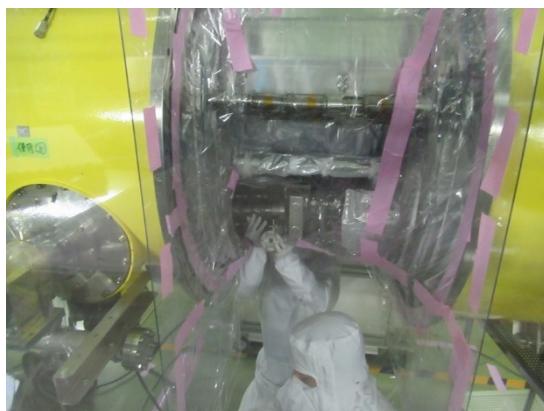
Reassembly work of bellows in STF-2 cryomodule
